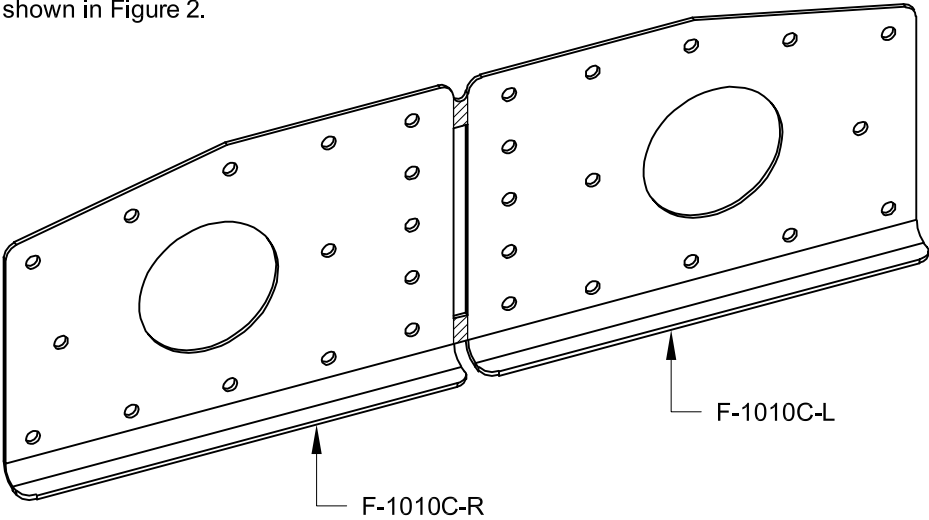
POSITIONING F-1011 BULKHEAD PARTS
